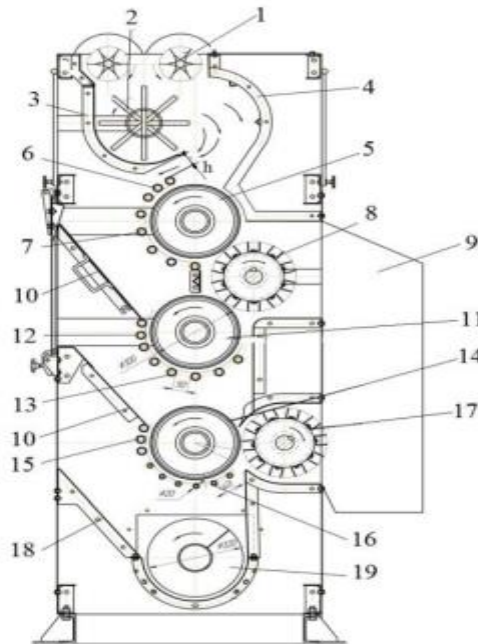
Cleaning according to the proposed technical solution general scheme of the machine.
